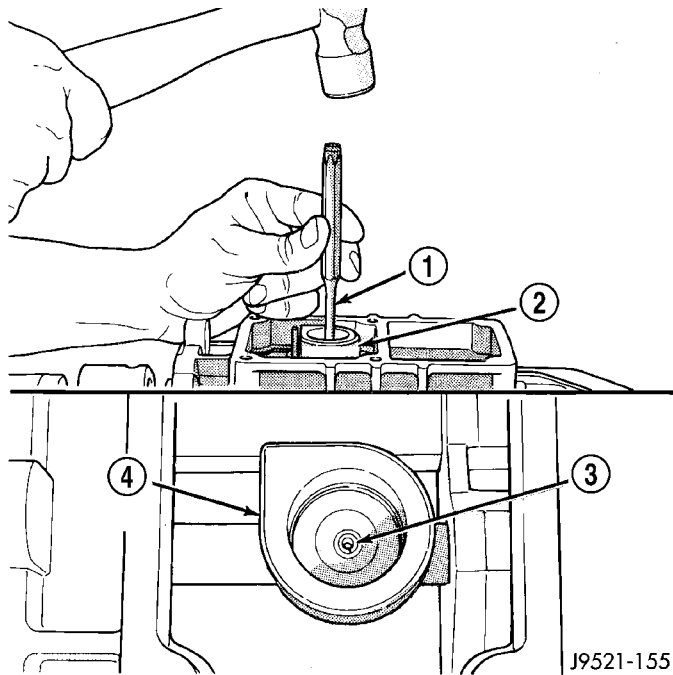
SEATING SHIFT SOCKET ROLL PIN
